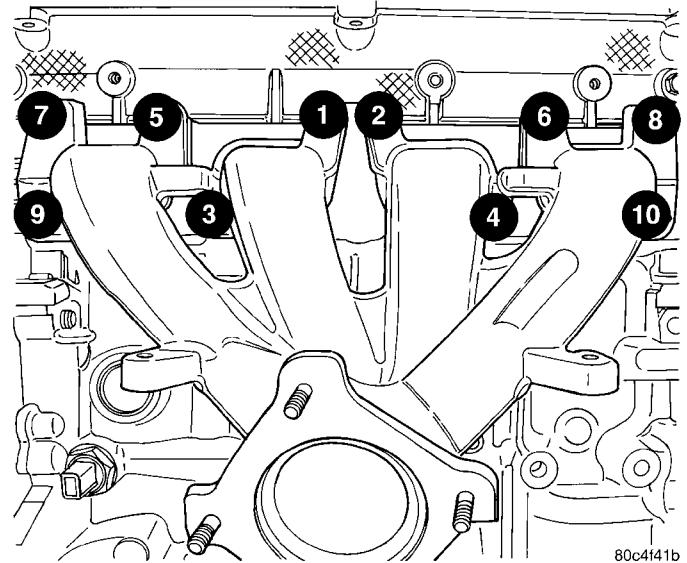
EXHAUST MANIFOLD TIGHTENING SEQUENCE
